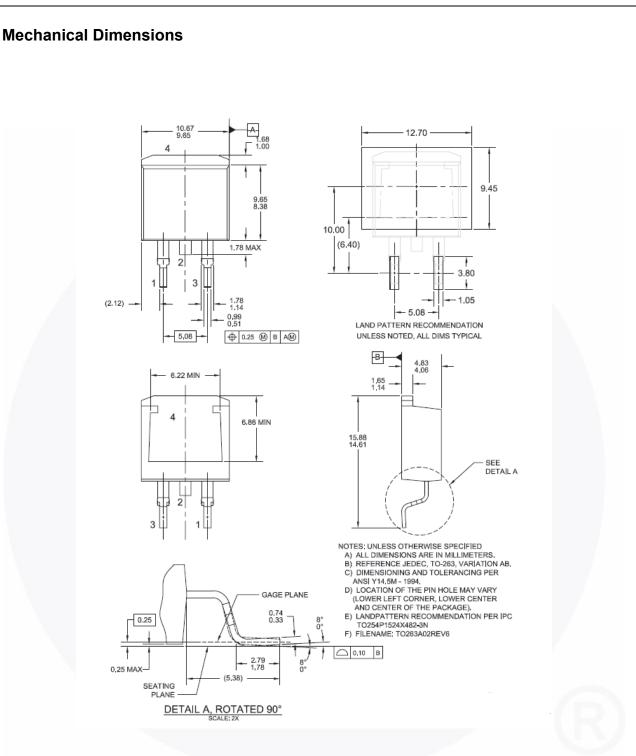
TO263 (D²PAK), Molded, 2-Lead, Surface Mount
